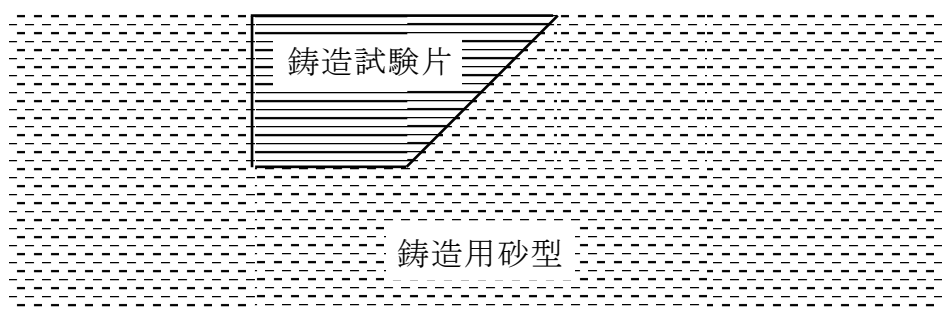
Schematic diagram of casting sand mold showing relationship between casting sand mold and cast specimen.
